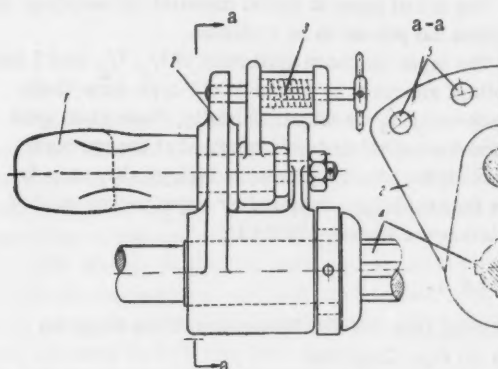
Head of the turning mechanism: 1) Fork; 2) segment with the body; 3) arresting mechanism; 4) grooved shaft; 5) openings for inserting the forks.
